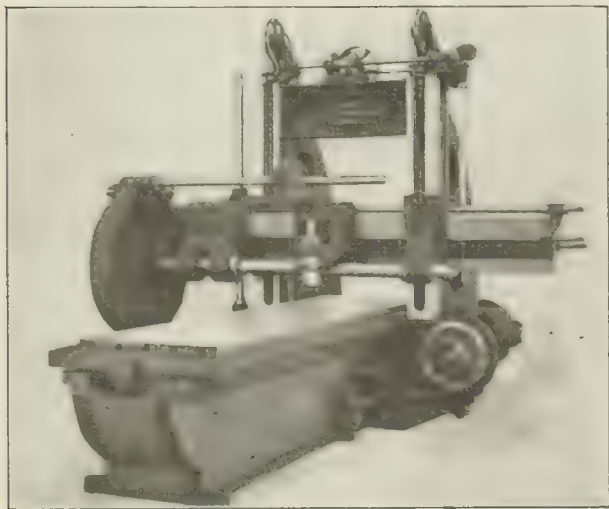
Ingersoll Horizontal Spindle Slab Milling Machine, with Special Vertical Spindle Attachment for Key Seating.
